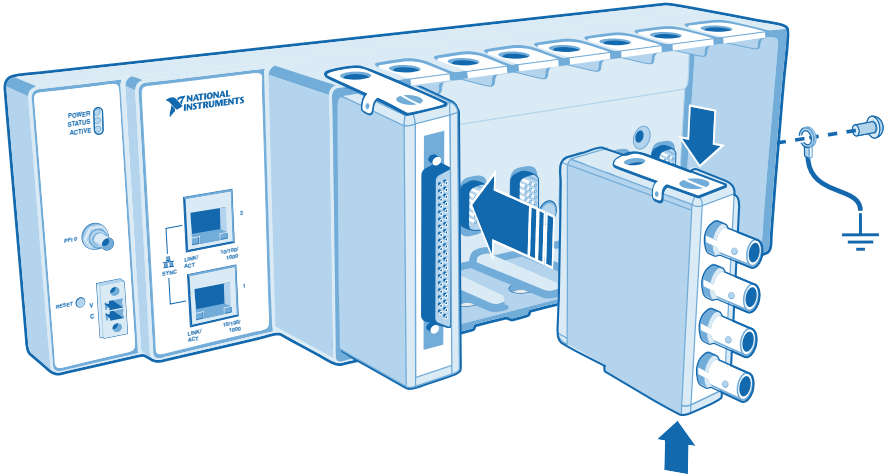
Ring Lug Attached to Chassis Ground Terminal
